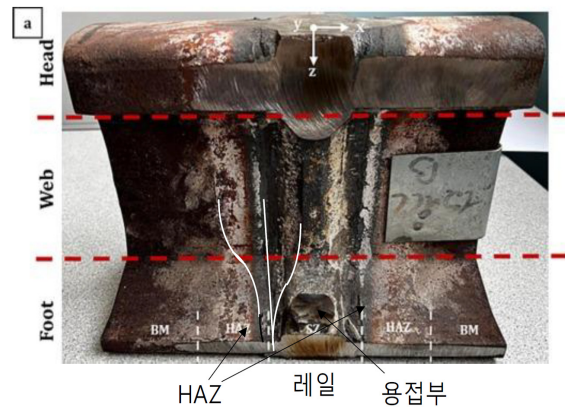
Predicted location and direction of thermite weld fatigue cracks^[24]
